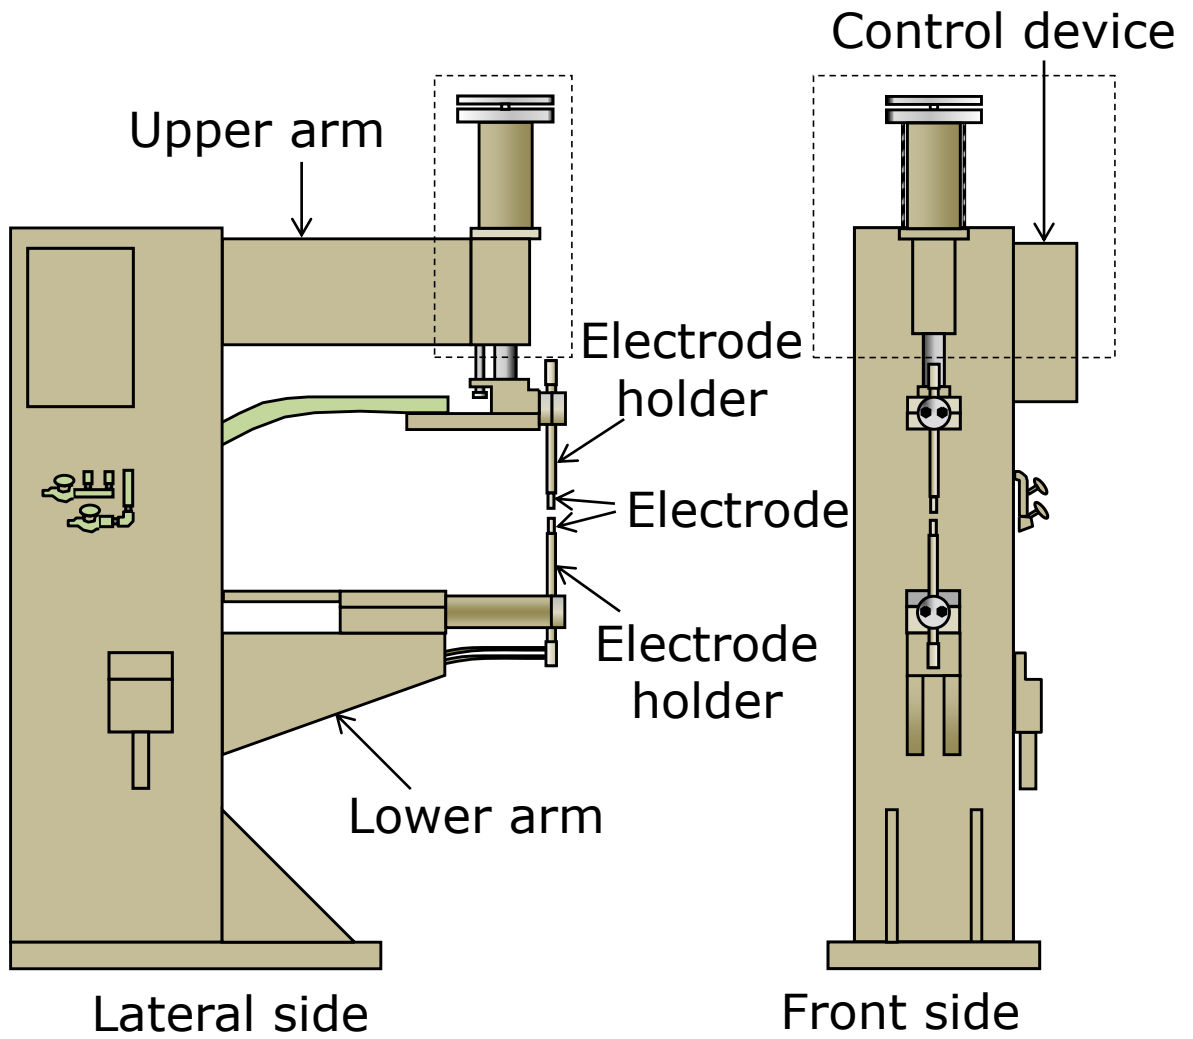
Schematic diagram of resistance welding machine
